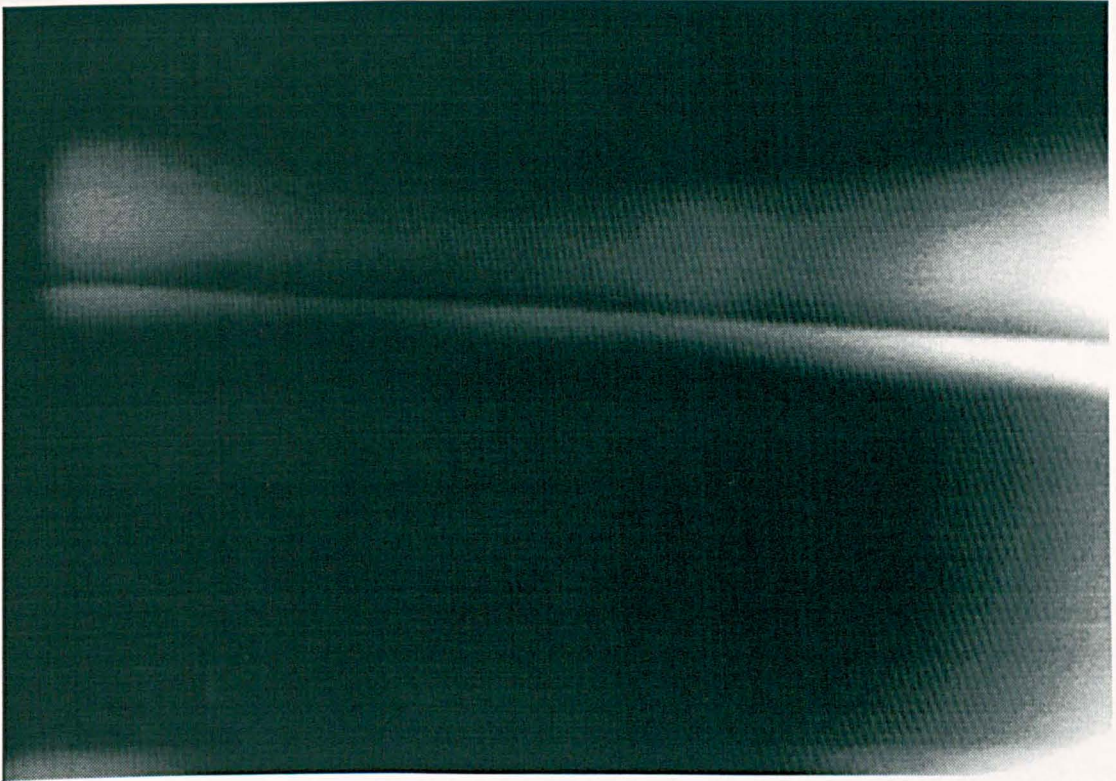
Welded Seam Showing Sensor Saturation at Right Hand Edge
